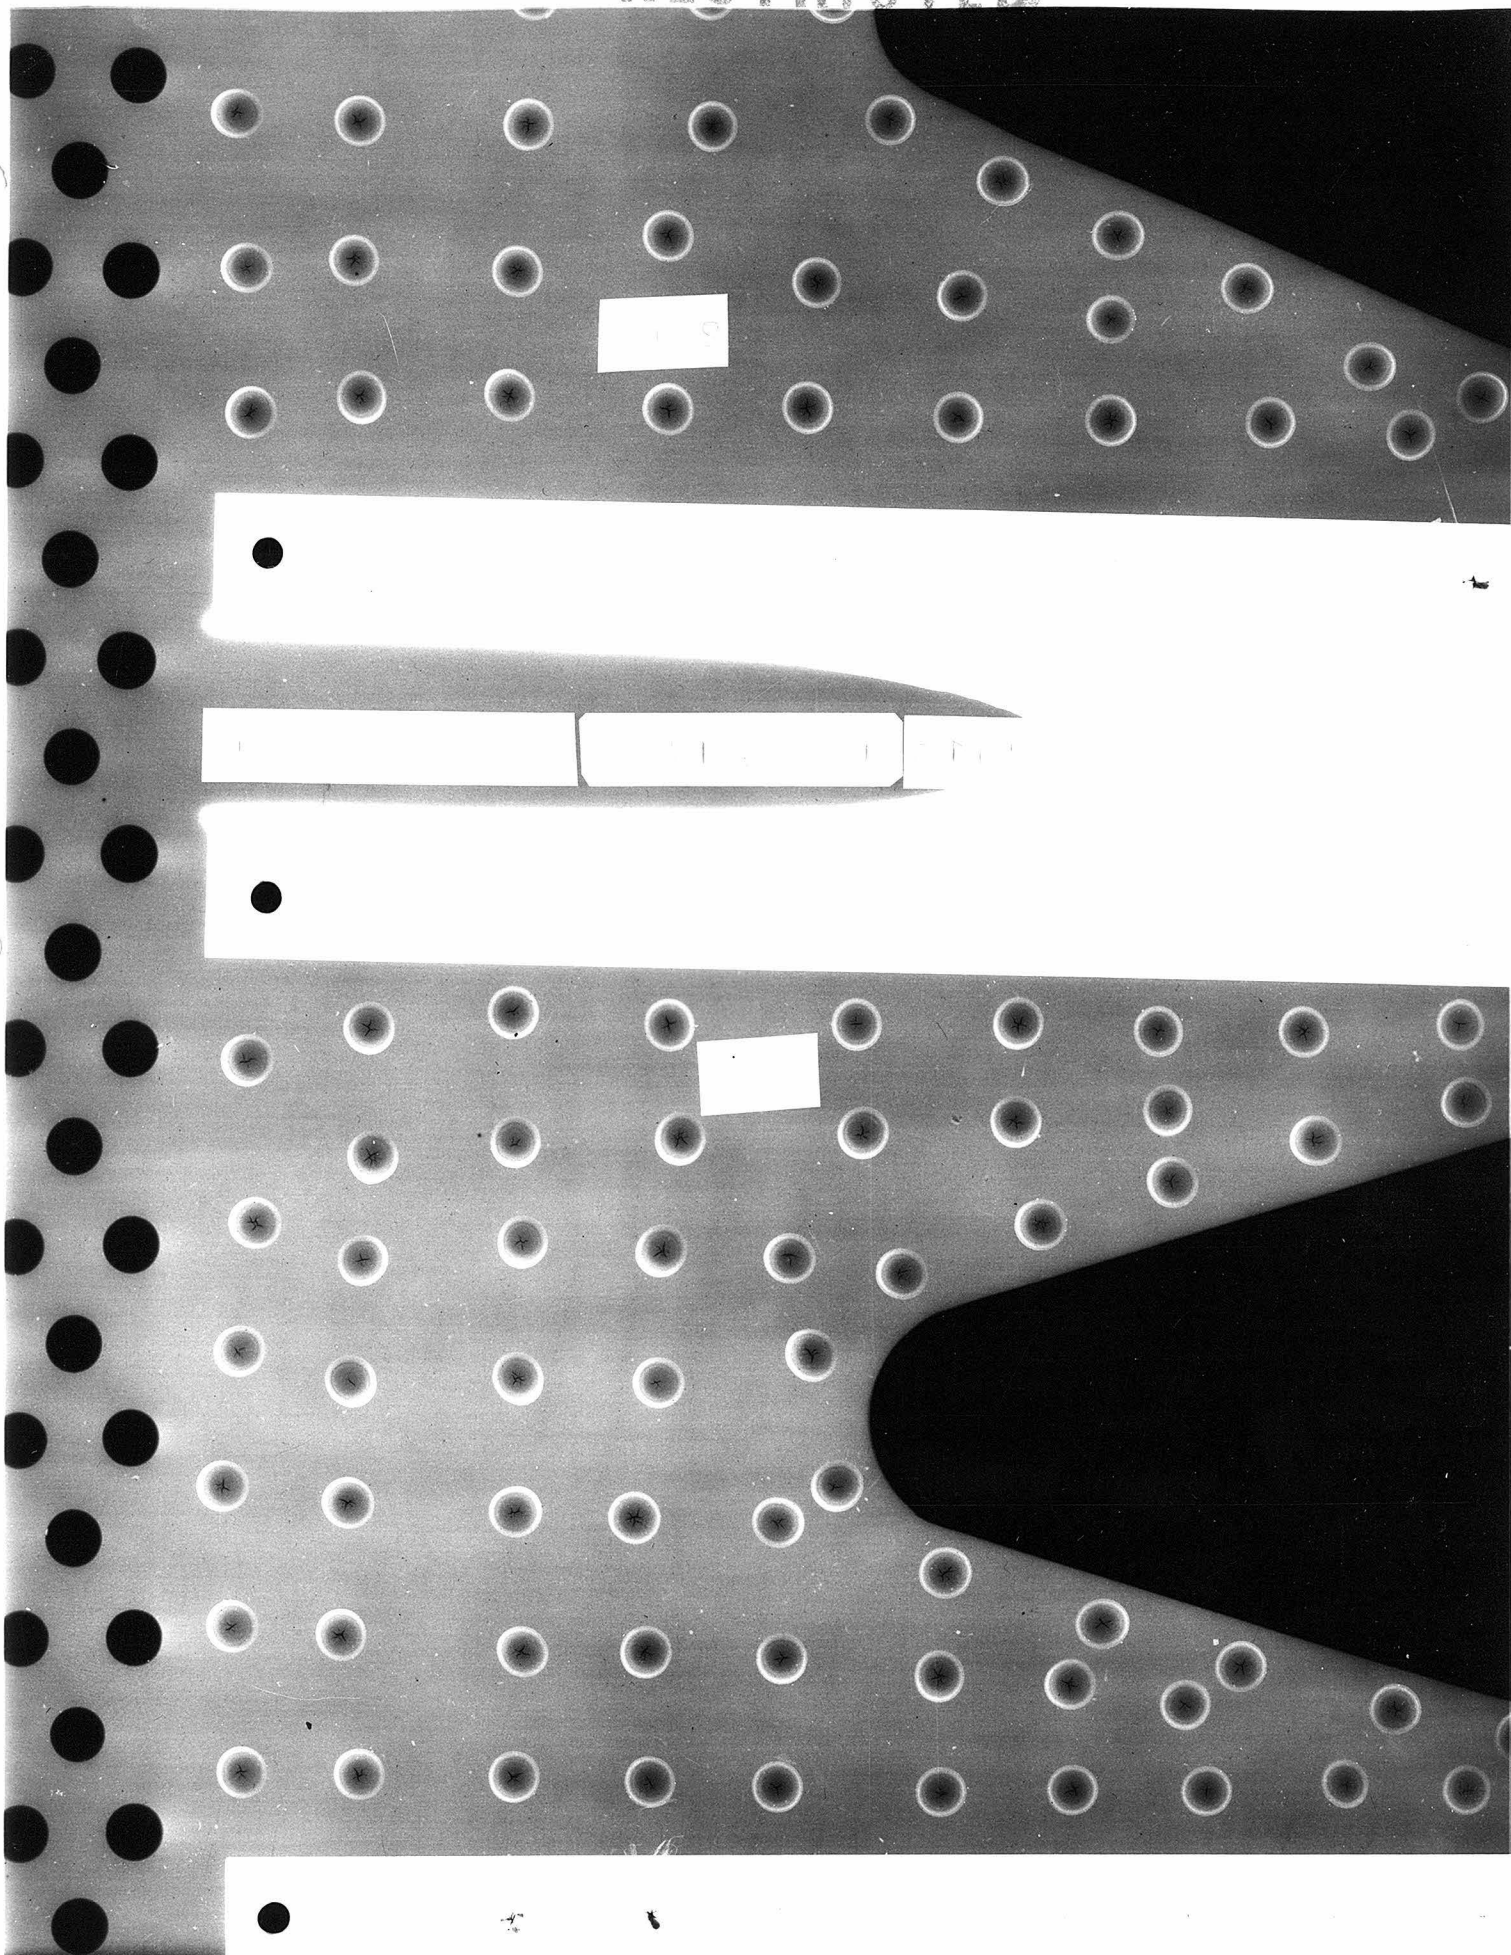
RADIOGRAPHS OF SPOT WELDS IN TAIL BOOM OF A PURSUIT PLANE.
